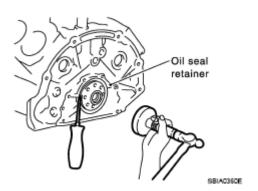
Removing/Installing Rear Oil Seal Courtesy of NISSAN MOTOR CO., U.S.A.
